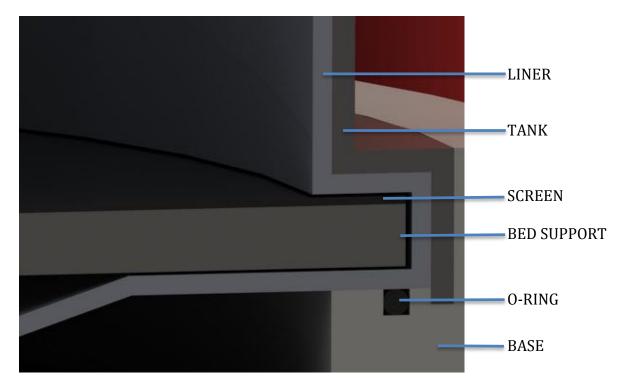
Cross section of the interface of the base, screen, bed support, O-ring, and liner. The cross section view demonstrates the importance of properly toleranced parts due the requirement of having a proper seal. The liner and O-ring provide a seal as the bed support, screen, and base are compressed together. The compression is achieved using a component known as the compression ring.
